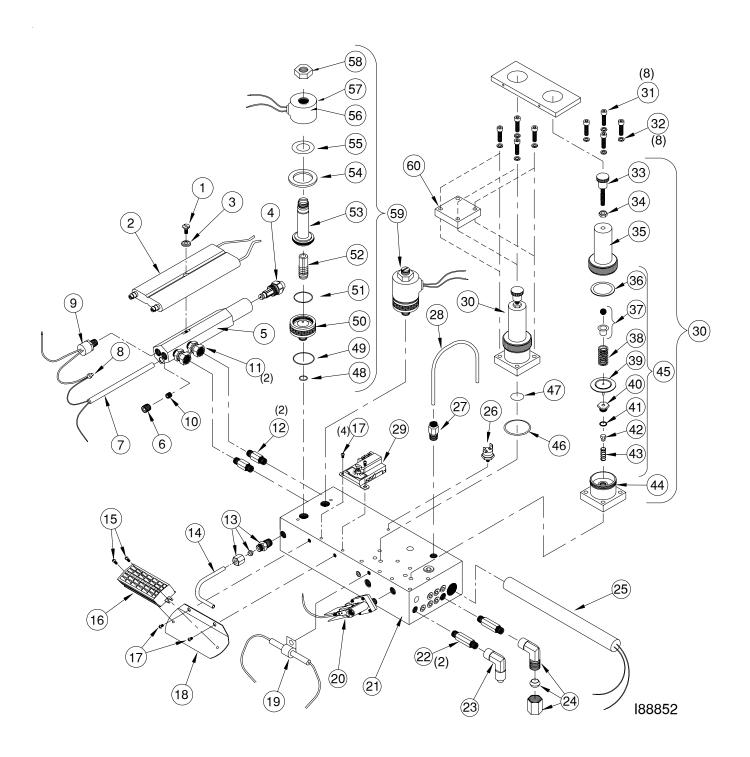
CB-500-CE 5W Preheater Block and Electrode Assembly Component Detail (CB-200-CTB)
